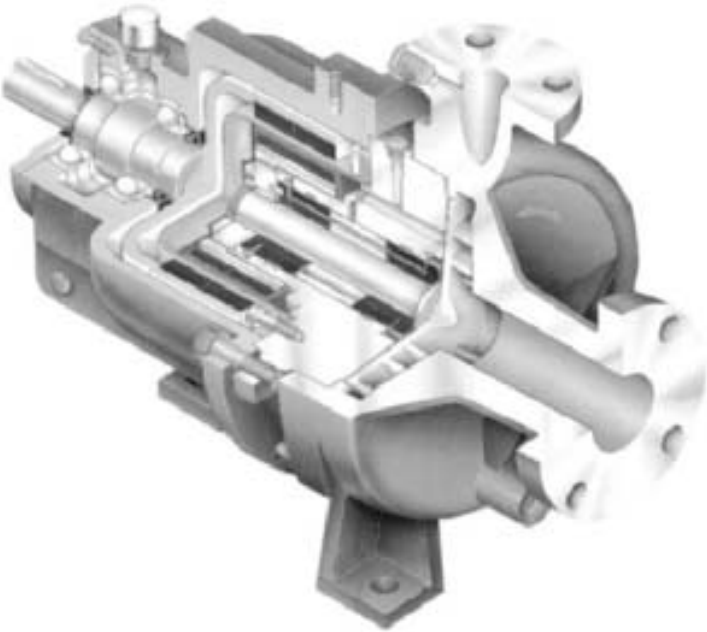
Typical magnetic drive sealless pump (Ref. Subsection 2.2.7) (Flowserve Corporation)
